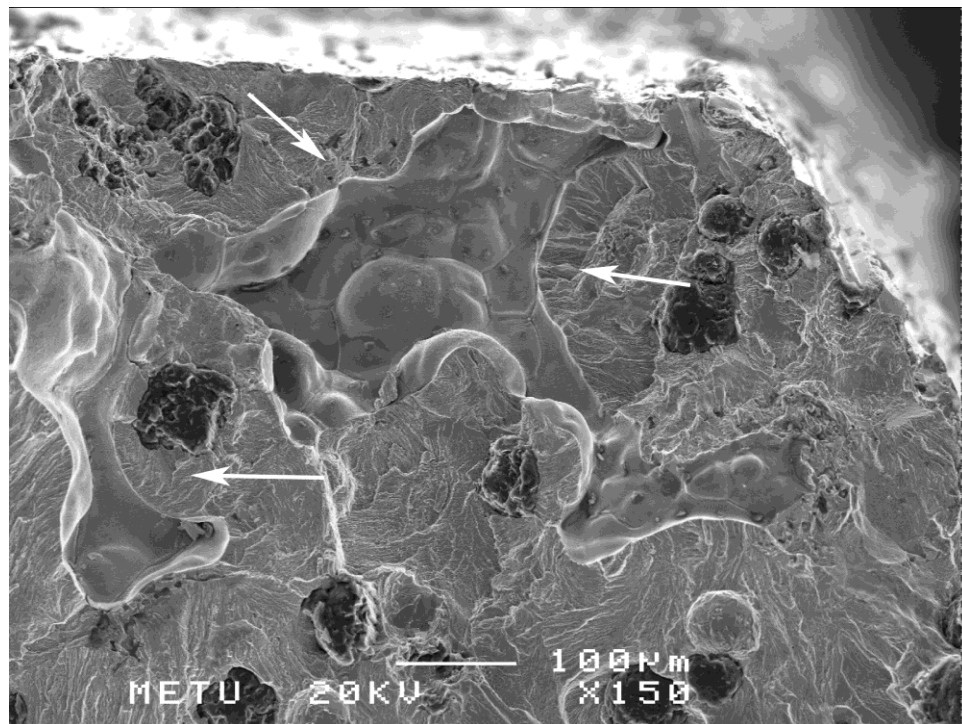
Casting void near surface, marked by arrows (Specimen PWHT400-2)
